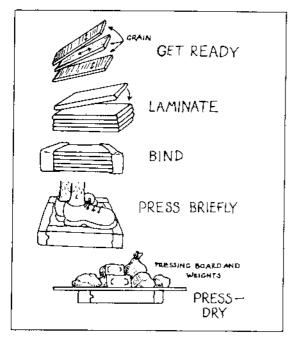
Laminating - work quickly, racethe-stretch (d) To make boards from thin card, first get all your cards ready. Layers need not consist of whole cards. Pieces of card fitted together can also be used. Arrange cards so when you layer, the grain of the cards alternates. Then:
